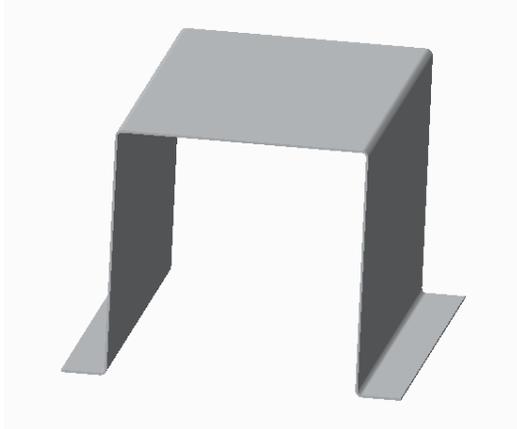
a) CAD of compressor cover plate made in Creo version 2
